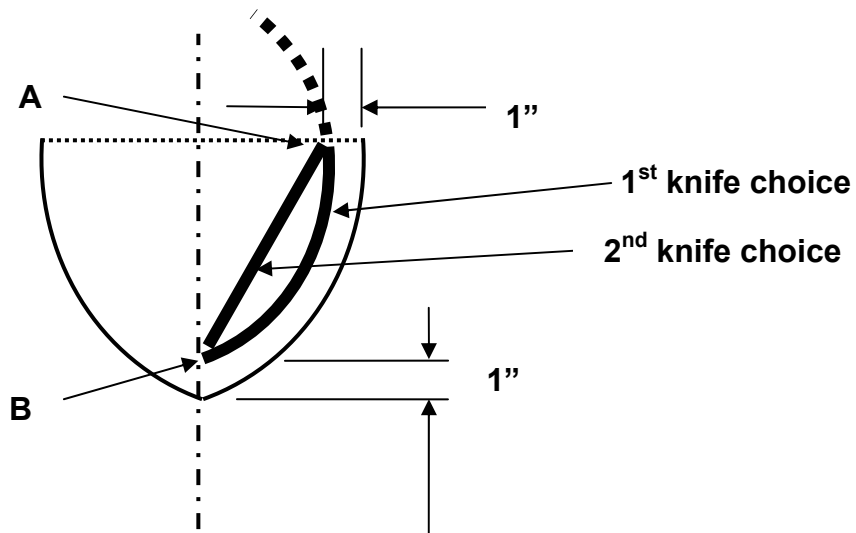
Side view of tall coring blank with two alternate knife kerfs
